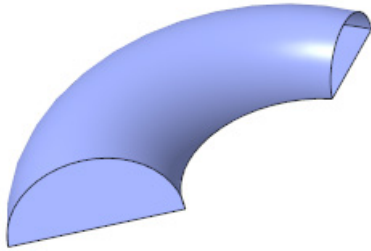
Rotational blend surface with open ends created using a closed sketch
